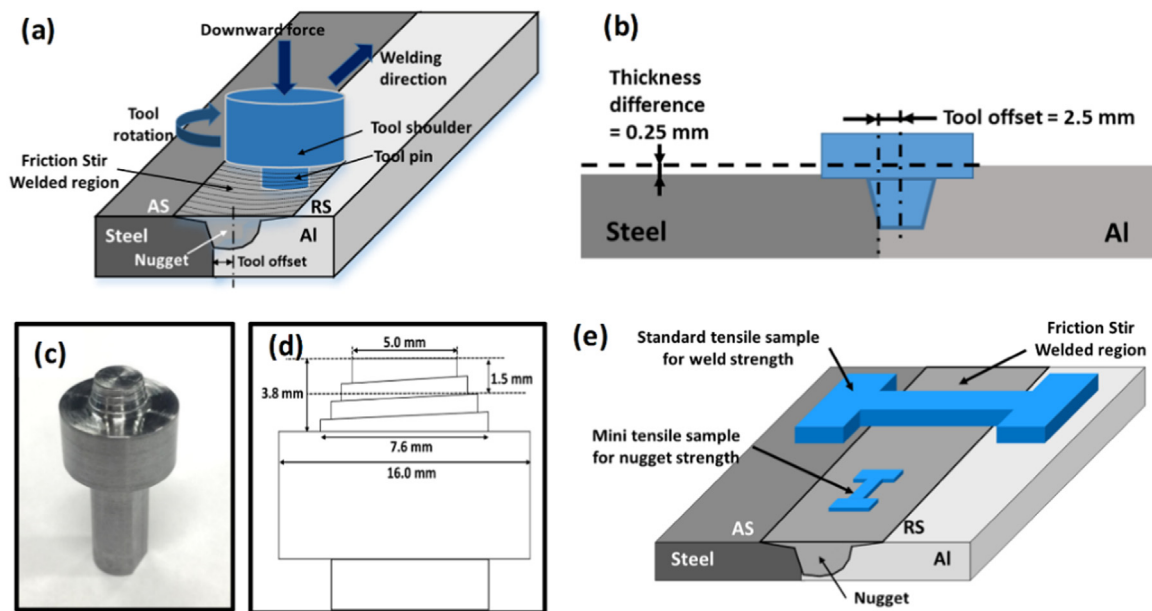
(a) Schematic of FSW of aluminum and steel sheets, (b) schematic of the cross-section displaying tool offset and sheet thickness difference, (c) photograph of a W-Re tool, (d) dimensions of the W-Re tool, and (e) schematic of fabrication of standard E8 tensile and mini-tensile samples.
